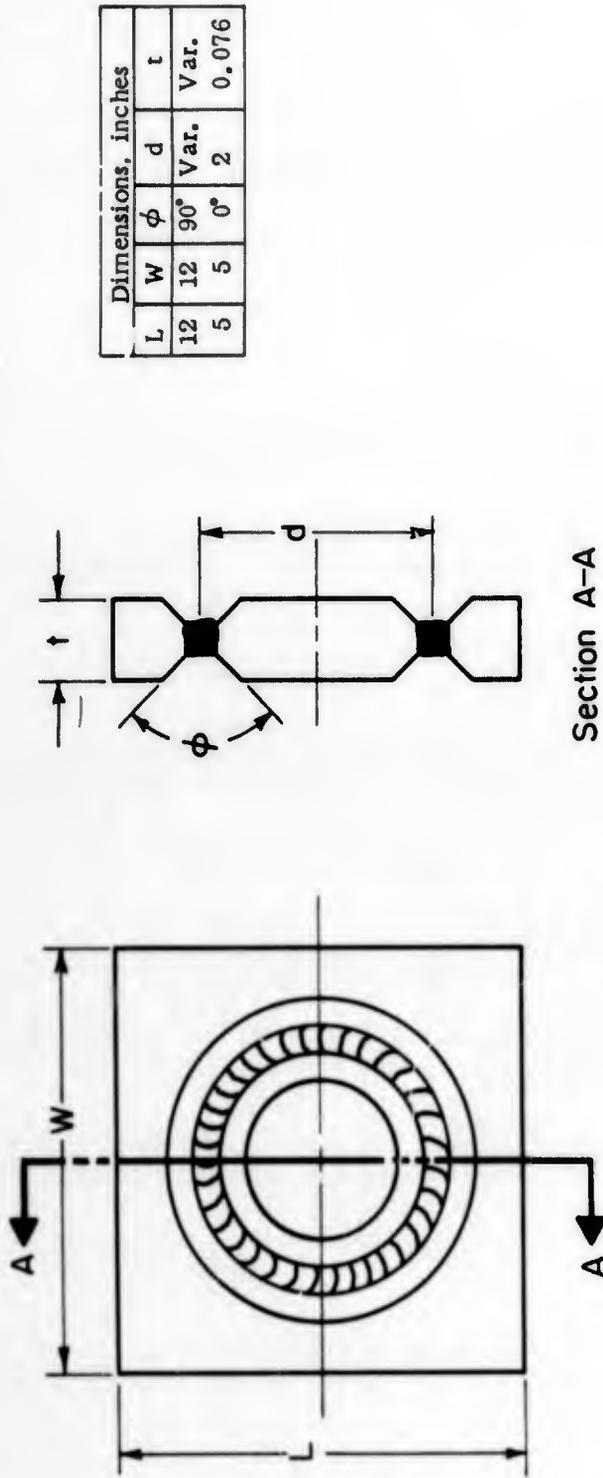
Circular Patch Weld Restraint Specimen (Ref. 11).
